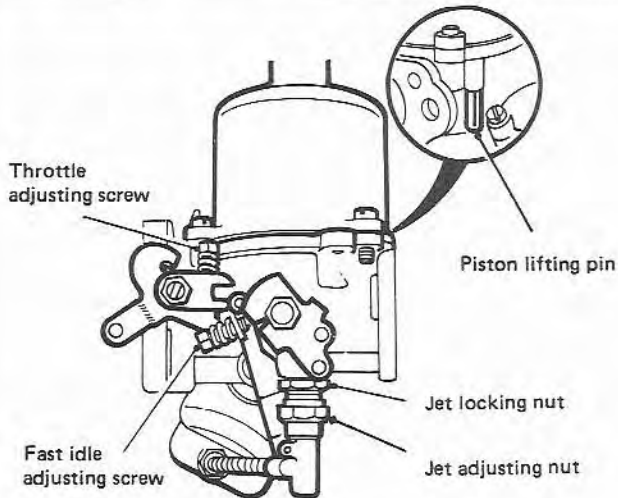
HS carburettor adjustment points (Sec 9)
